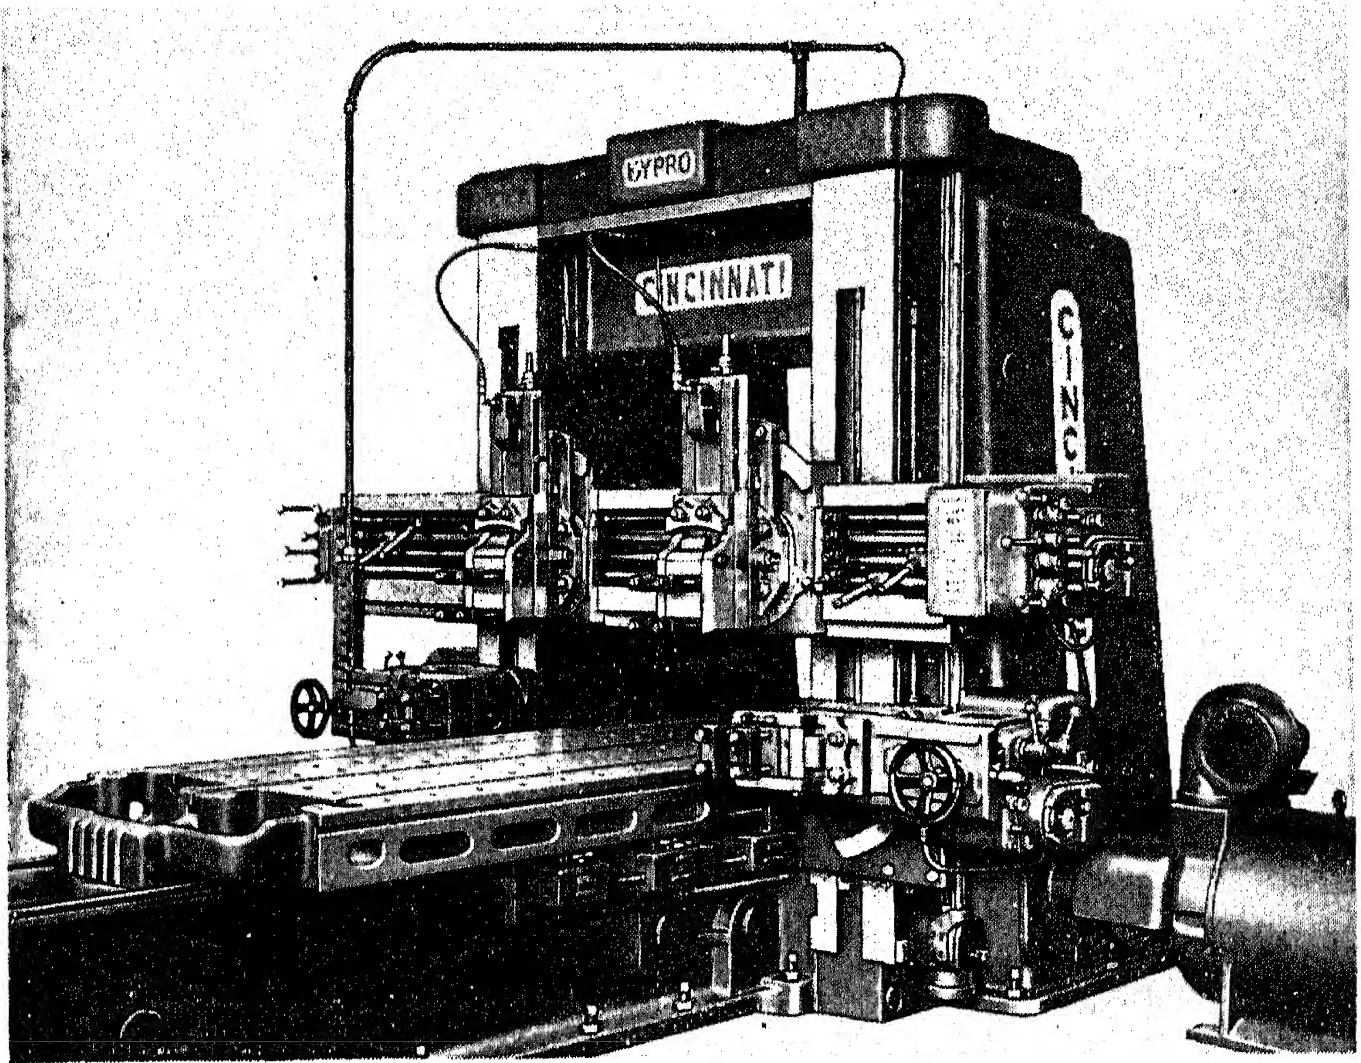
A 48 in. by 48 in. by 16 ft double housing planer with twin helical gear drive. (Courtesy The Cincinnati Planer Co. Div., Giddings and Lewis Machine Tool Co.)
